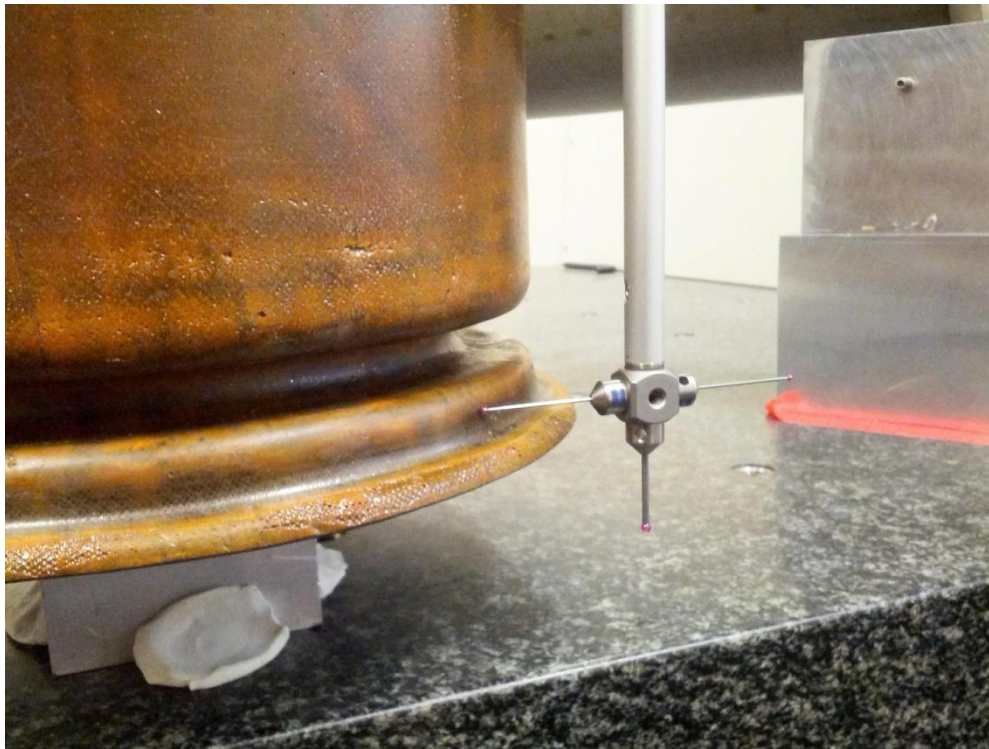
Measuring the Outer Bead Seat Tolerances Using a CMM
